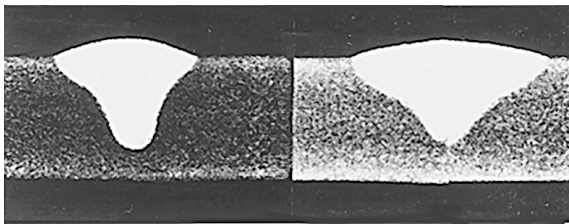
Gas-metal arc welds in 6.4-mm-thick 5083 aluminum made with argon (left) and 75% He–25% Ar (right). Reprinted from Gibbs (9). Courtesy of American Welding Society.
